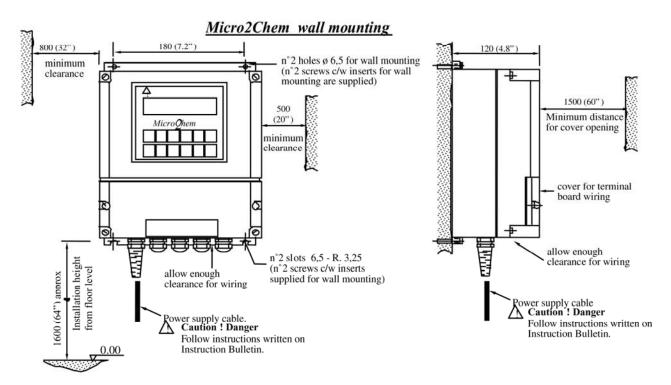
Typical Wall-mounting Installations of MicroChem®2
